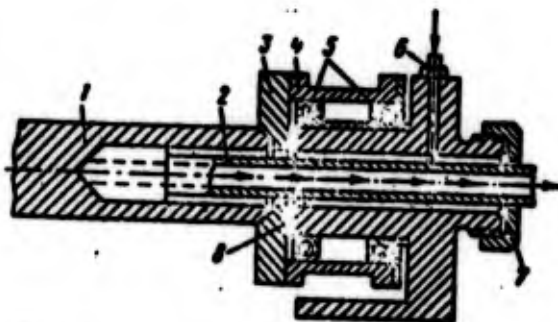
Diagram of design of an oil receiver: 1 - shaft to be machined; 2 - drill for deep drilling; 3 - flange; 4 - bushing; 5 - radial-thrust bearings; 6 - pipe connection for feeding the lubricating liquid coolant; 7, 8 - packings.
